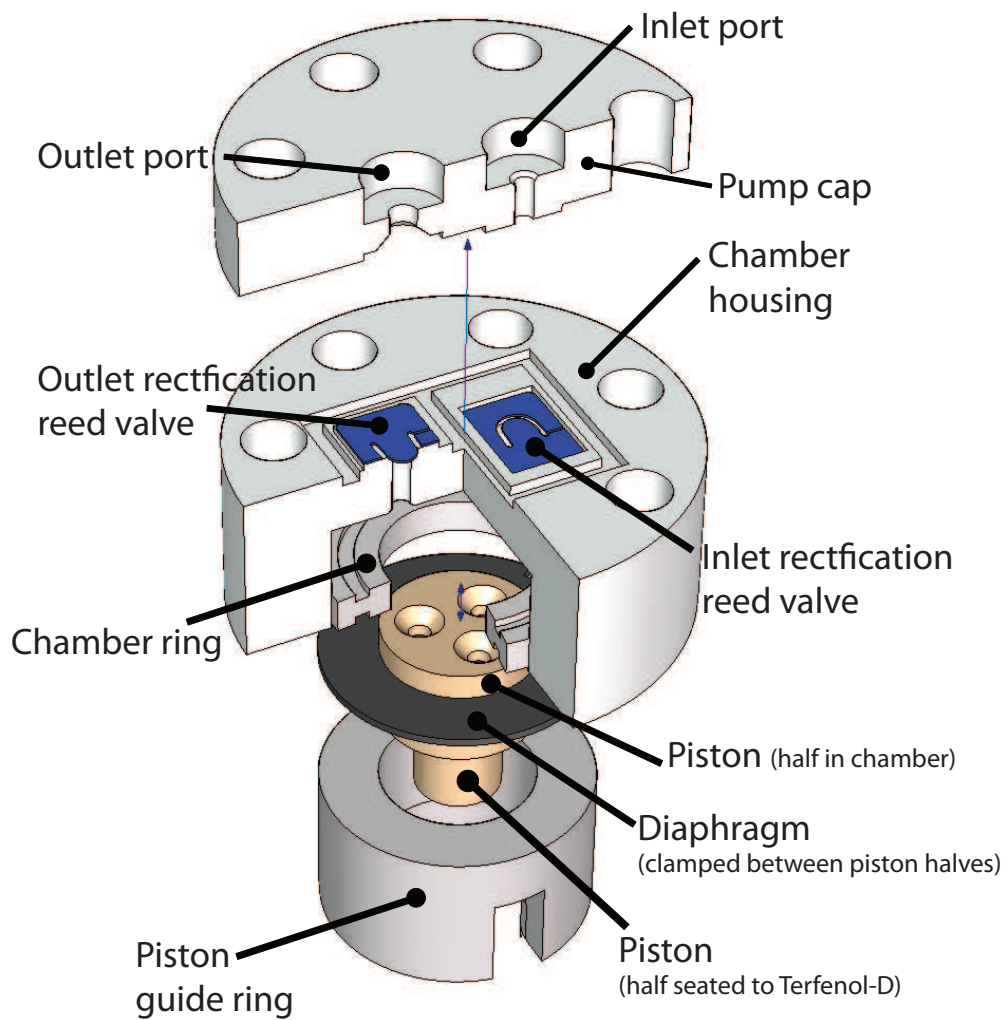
3D exploded, sectioned view of Terfenol-D pump head.
